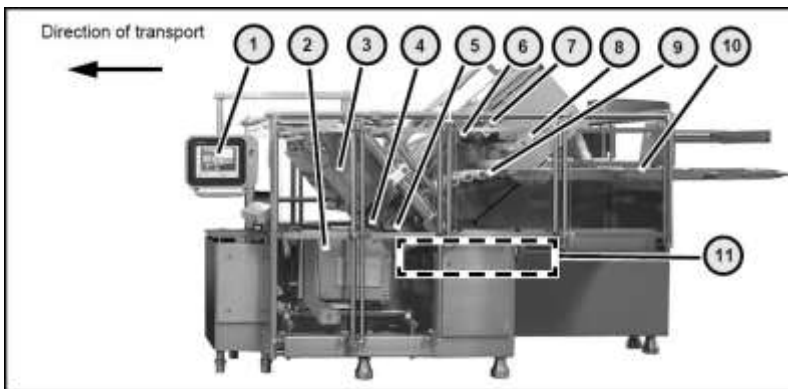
Machine overview (for product lengths exceeding 1200 mm)
